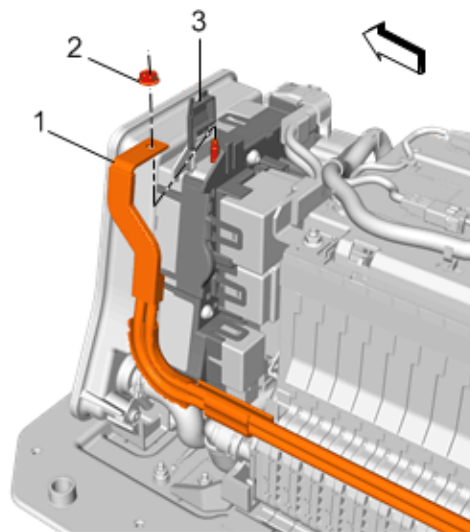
Terminal Cover, High Voltage Battery Positive Cable And Fastener
